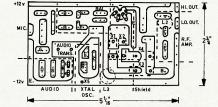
PRINTED CIRCUIT BOARD LAYOUT.
